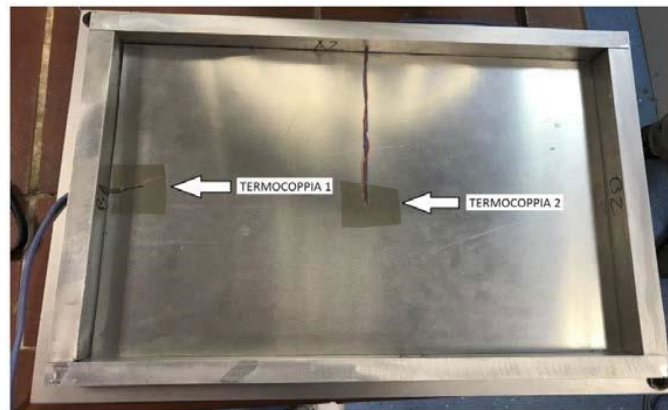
Locations of the thermocouples on the surface of upper half-mold.
